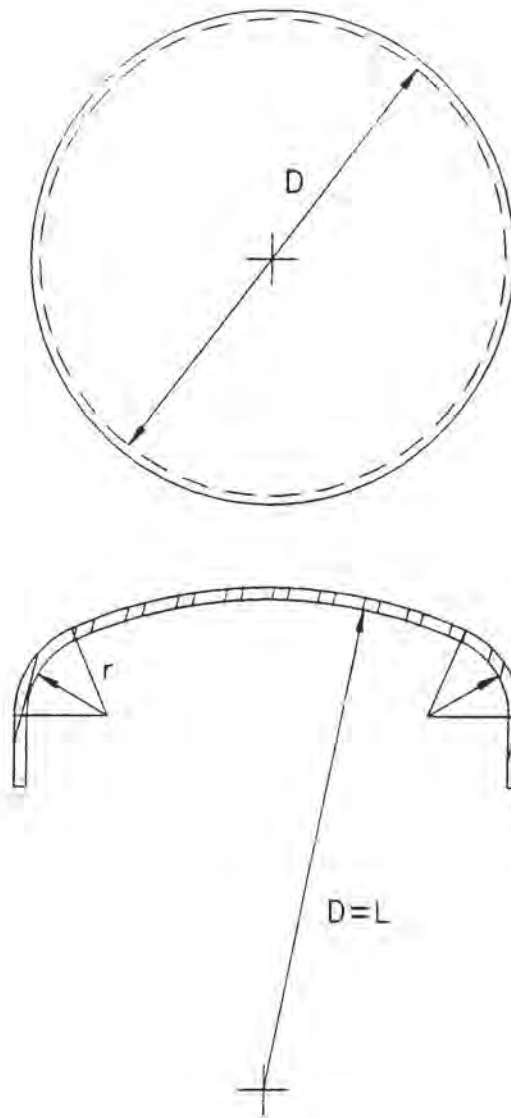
Typical ASME flanged and dished (torispherical) head used on cargo tanks.
